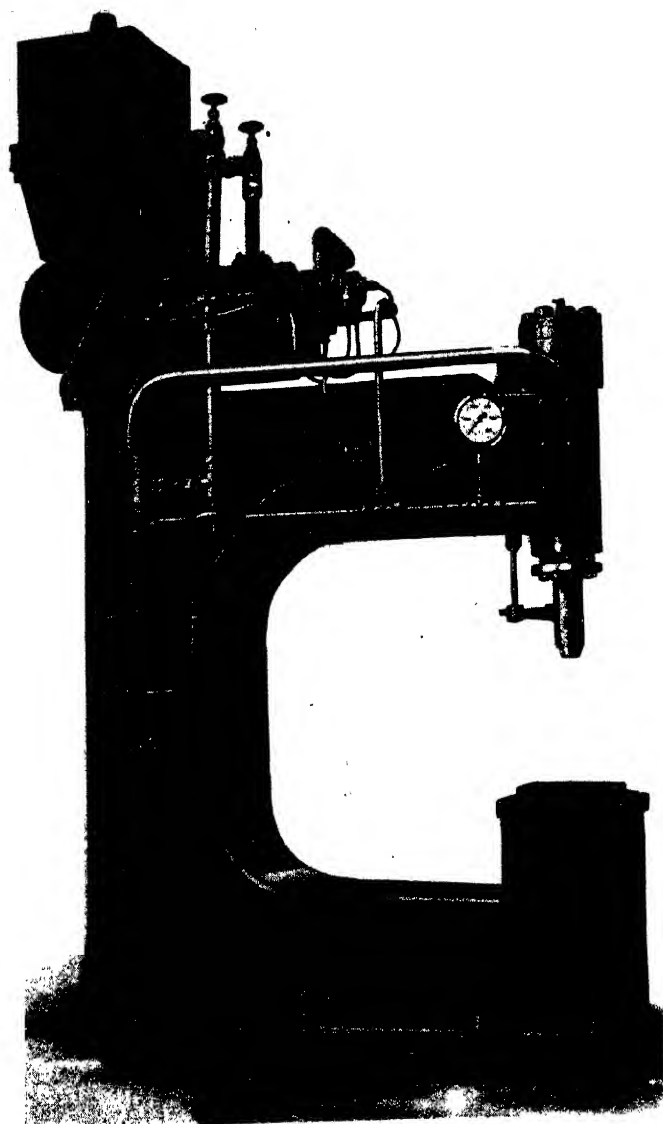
25-TON HYDRAULIC VENTILATOR DISHING PRESS
